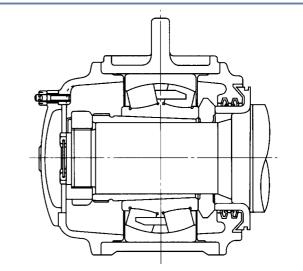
Spherical Roller Bearing with Withdrawal Sleeve
